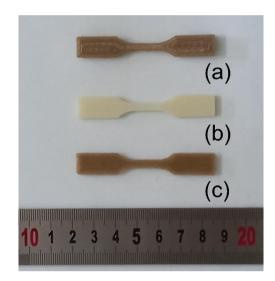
D638 tensile test specimen, (a) Pellet PLA + jute, (b) PLA, (c) Powder PLA + jute Fiber,
